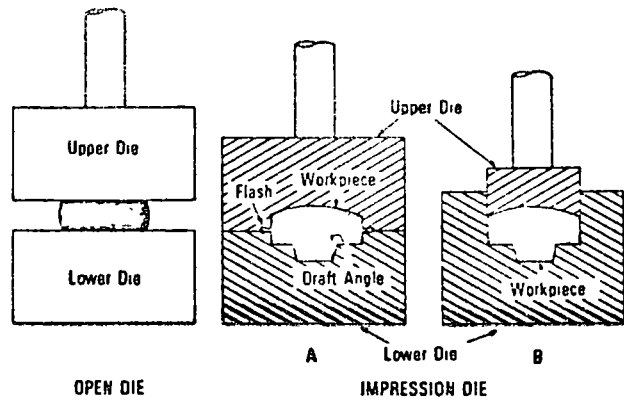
Open-die and impression-die forging operations. Most impression-die operations are similar to "a", flash is squeezed out between the dies as the metal fills the die pockets. Closed-die forging, as in "b", produces no flash, all of the workpiece is used to make the finished shape.
